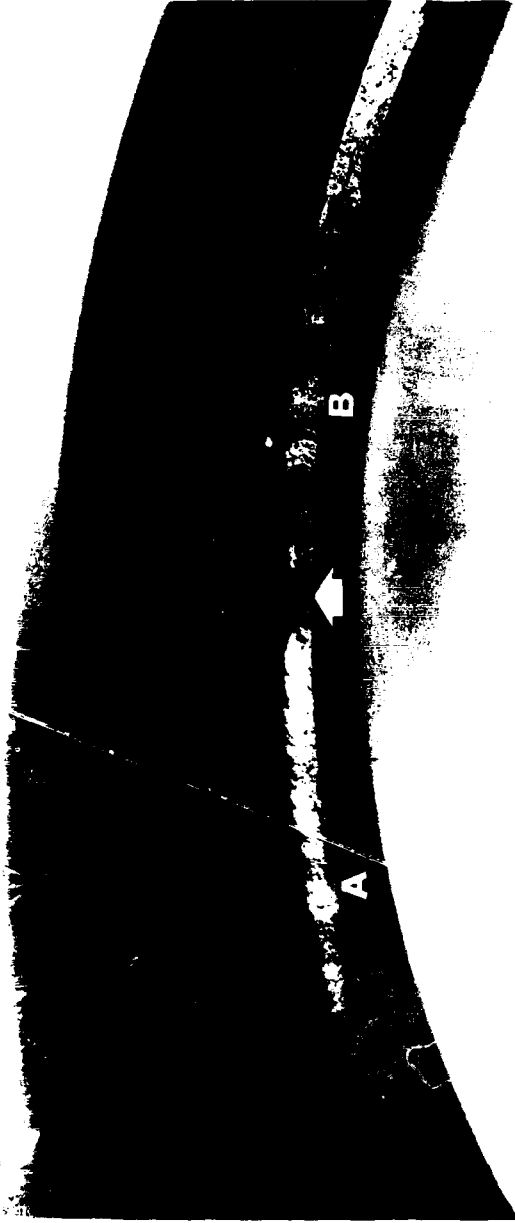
FATIGUE FRACTURE SURFACE - WHEEL TYPE "B", No. 2
